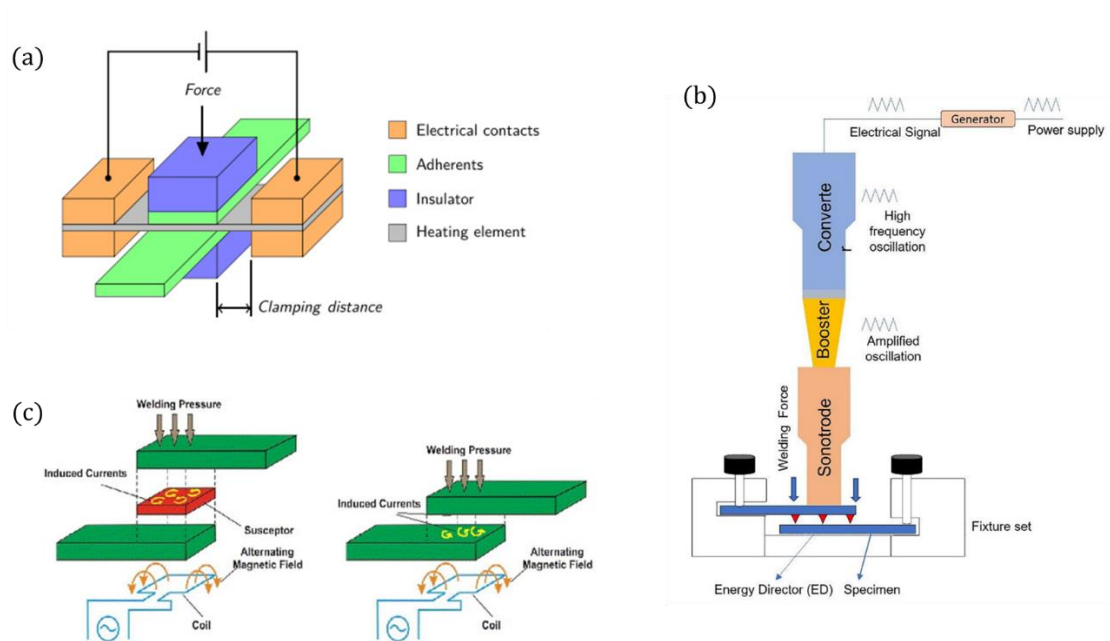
(a) Resistance welding [127], (b) ultrasonic welding [128] and (c) induction welding [129].
